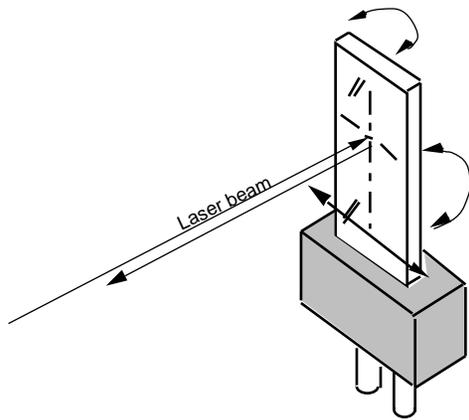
Alignment of the bi-post base socket using a jig and a laser beam.
